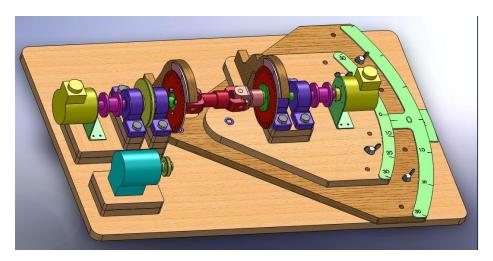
CAD drawing of automated test machine for examining a cardan drive
